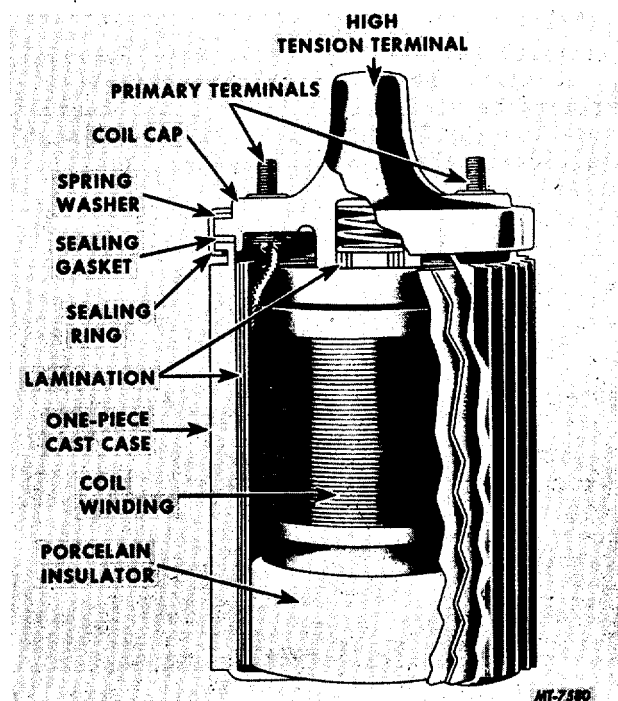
Diecast Encased Heavy-Duty Coil (Cutaway View)
